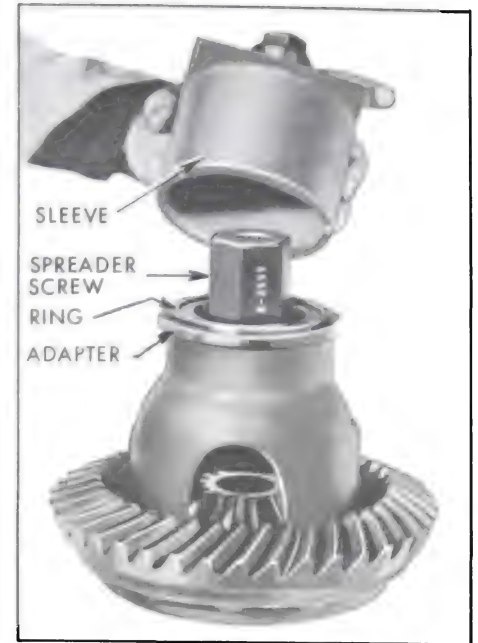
Installing Sleeve to Remove Bearing Outer Race
